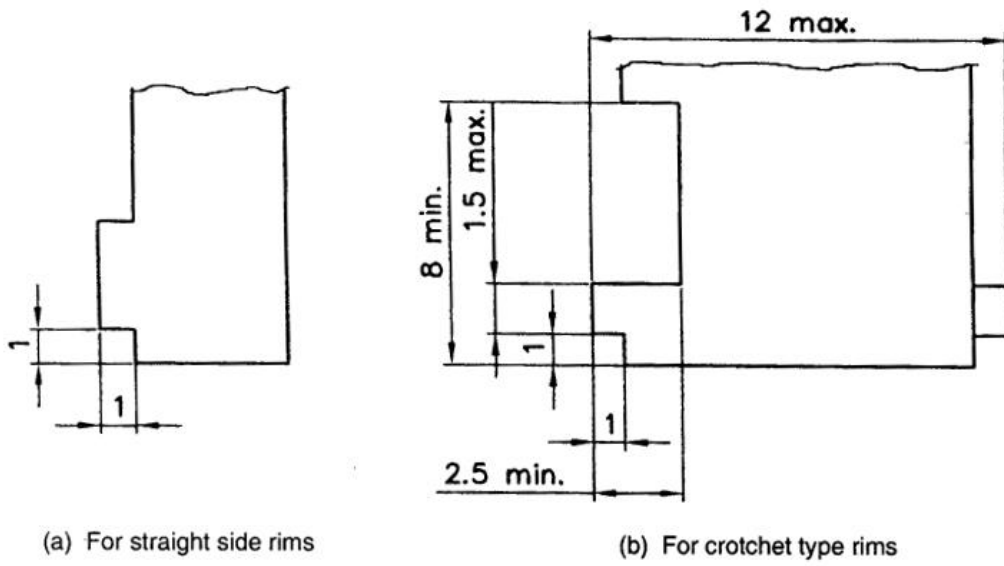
VERNIER GAUGE DETAILS FOR MEASURING FLANGE HEIGHT, G
